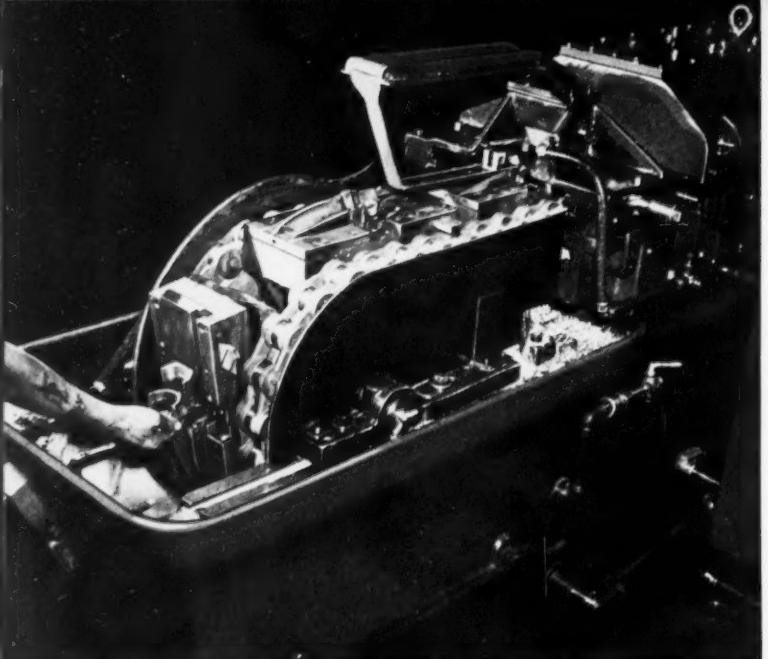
(Top) Continuous Type of Machine for Broaching Crankpin End of Connecting-rods
